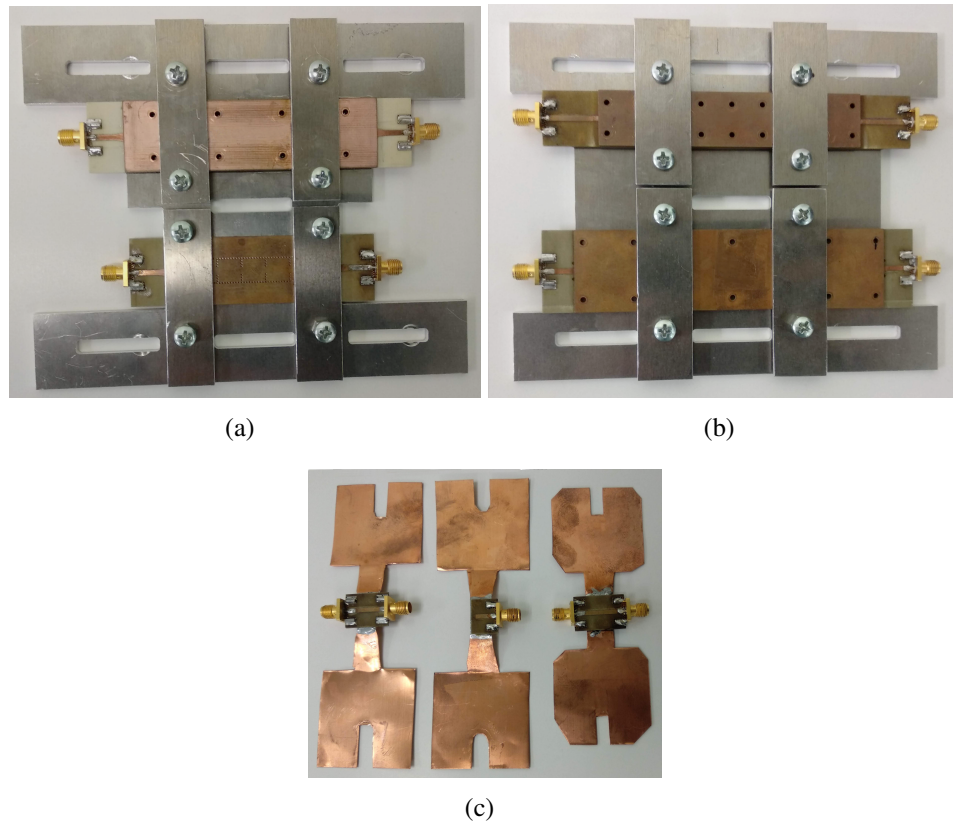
Test jigs used for the thermal cycling tests at high vacuum conditions. (a) Aluminum jig used for testing ADLS and SIW filters. (b) Aluminum jig used for testing ESICL and ESIW filters. (c) Microstrip calibration kit standards soldered onto thermal "bridges"; from left to right: through, reflect (open) and line.
